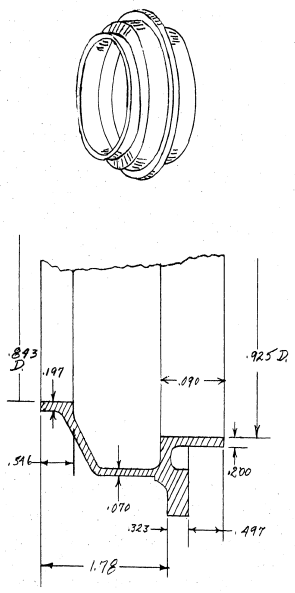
P/N 226961 - Rear Flange, Rear Main Bearing Vapor Duct Assembly, Material Ti-670
